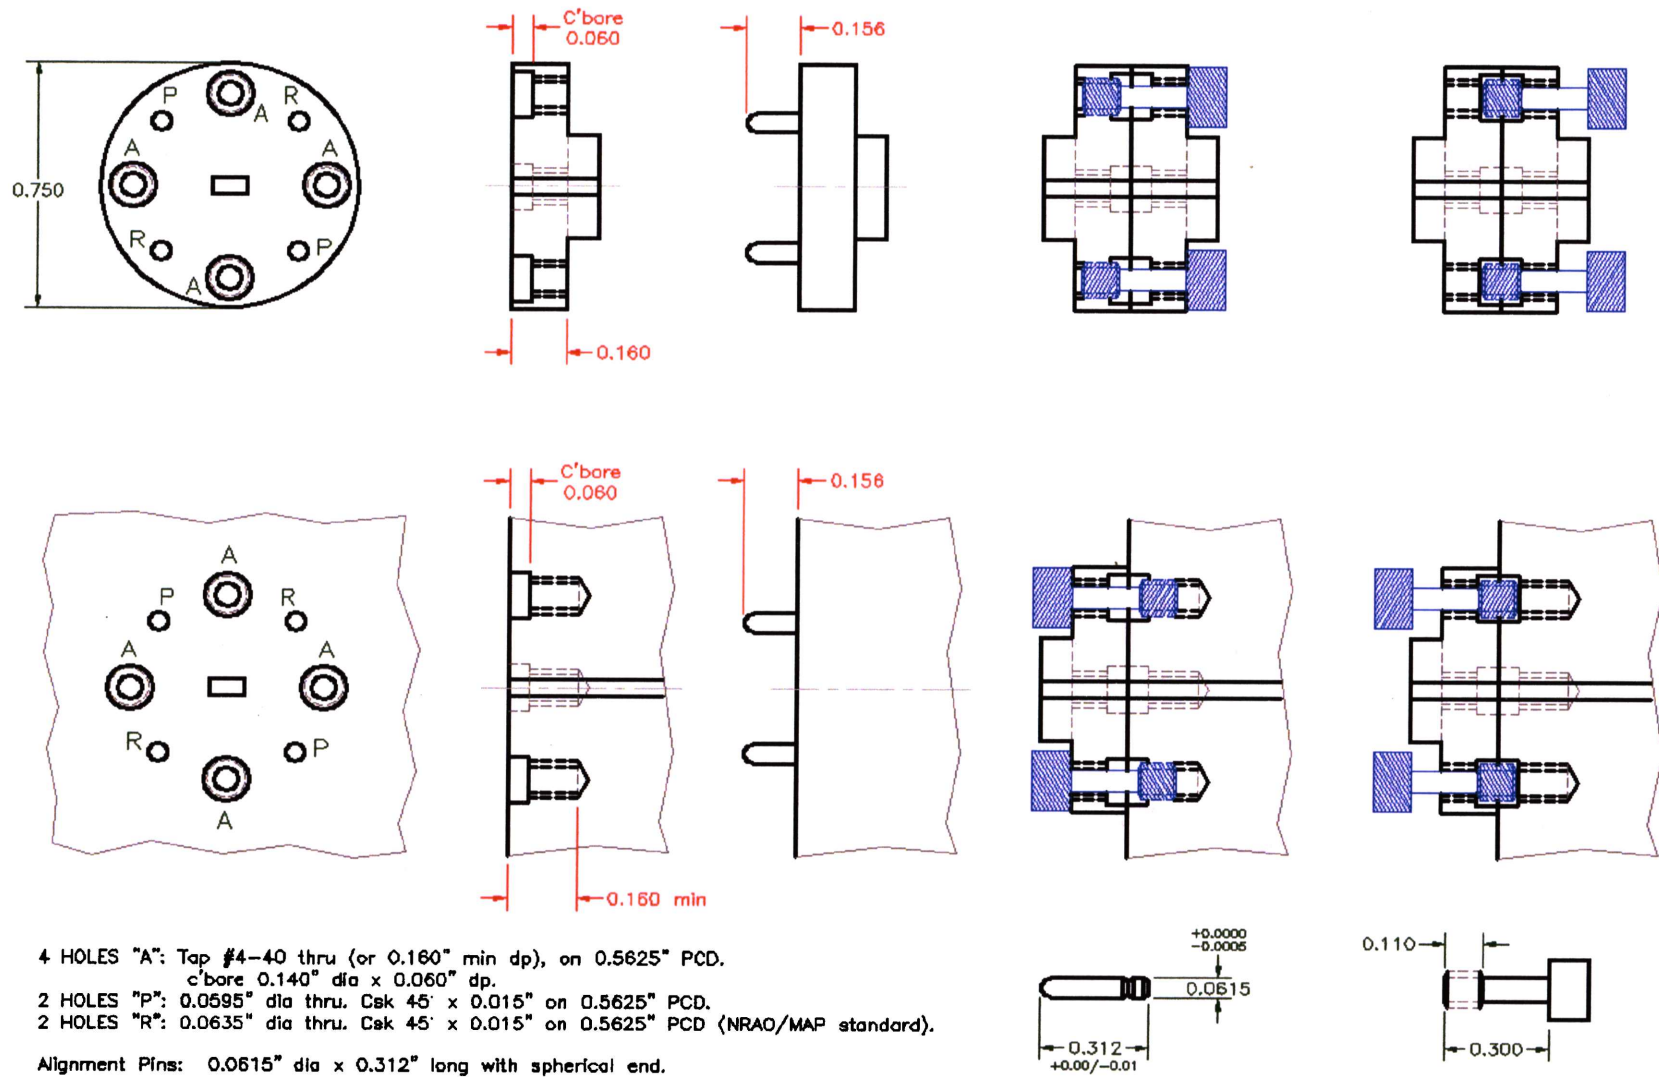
Upper: Flat flange (dimensions also apply to the anti-cocking type of flange). The upper right diagrams show a pair of flanges engaged with the screws inserted and withdrawn. Lower: Details of a waveguide block compatible with both the standard /67B flange and the flat or anti-cocking flange types. The lower right diagrams show such a block and a waveguide flange engaged with the screws inserted and withdrawn. In both upper and lower diagrams important differences from the standard /67B flange dimensions are indicated in red.
